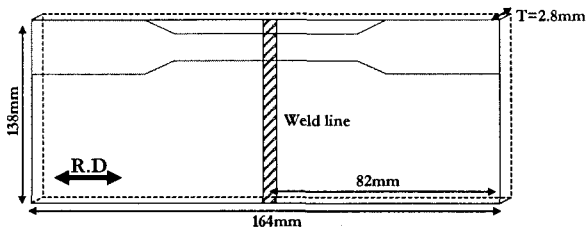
Preparation of weld coupon ( I square butt joint)
